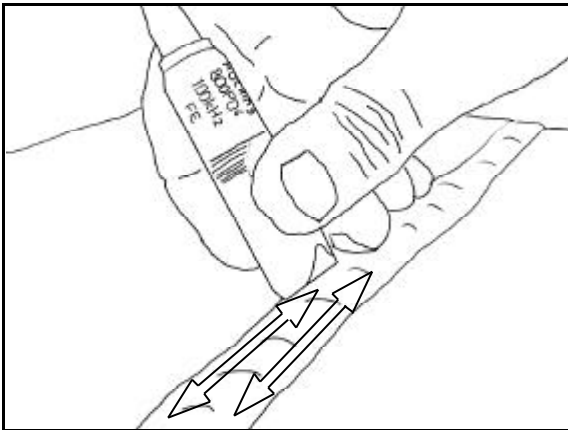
C - Scan of Weld Cap (inter pass toes)
